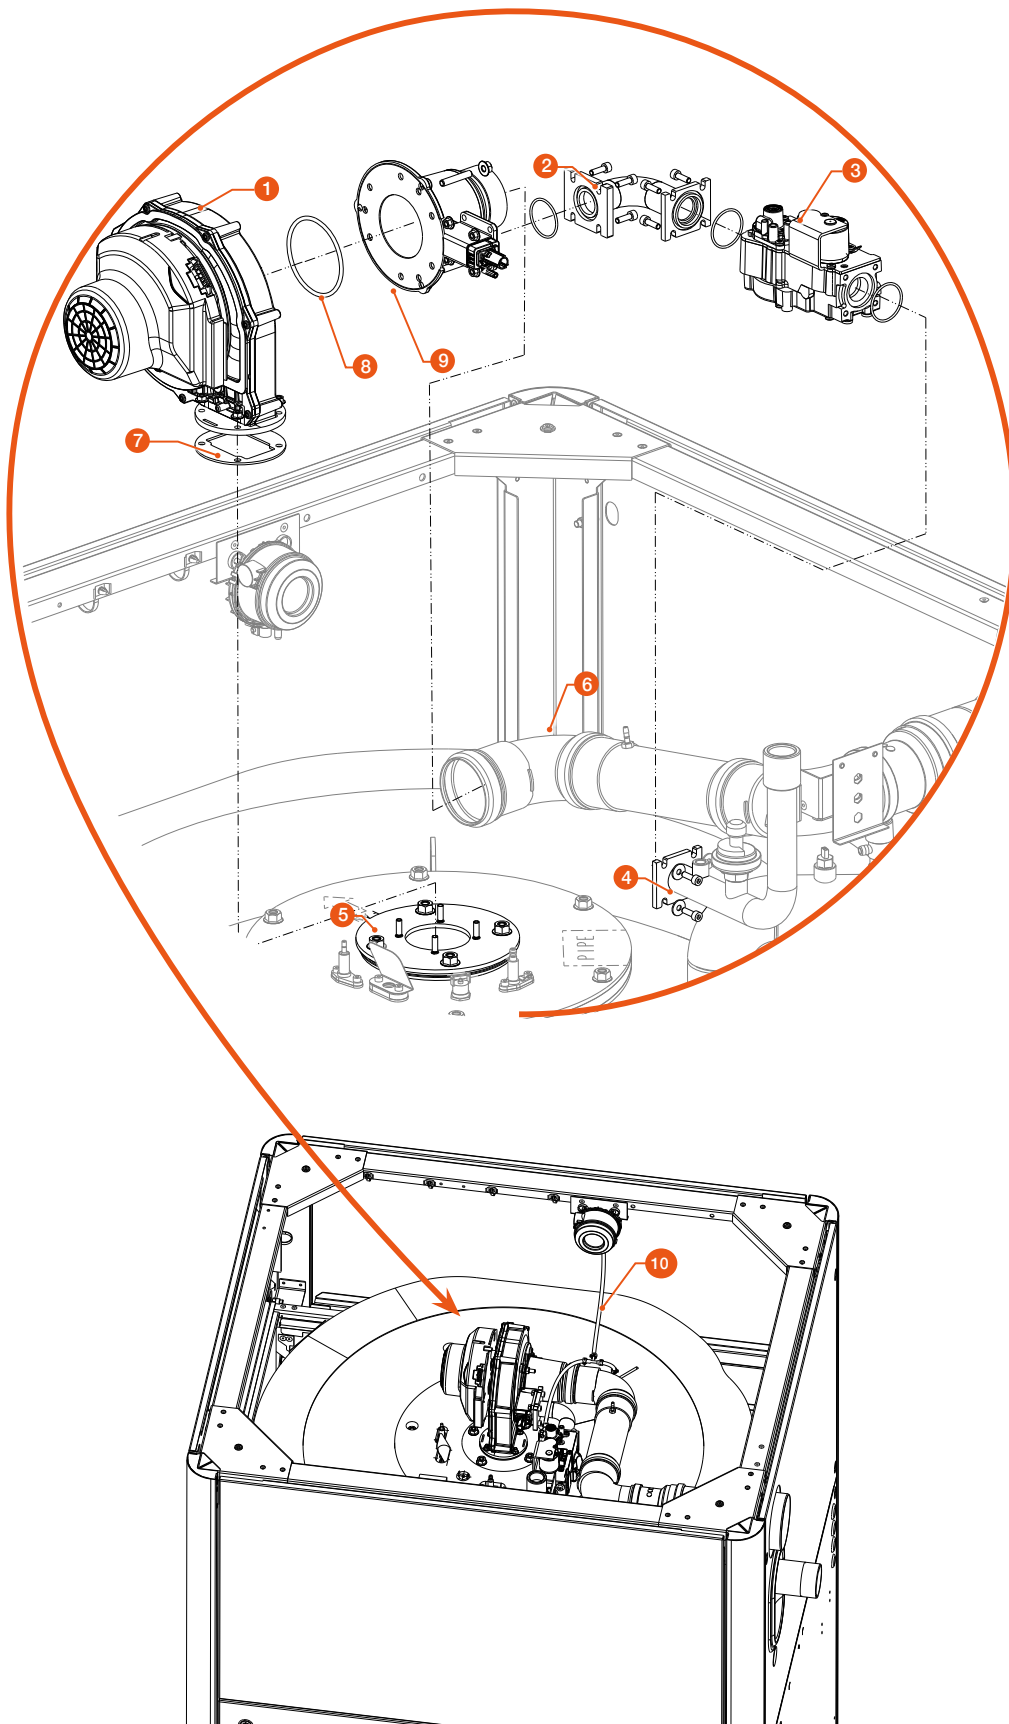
TEXAS 99 - Removing and Installing the Fan/Venturi Assembly and Gas Valve
